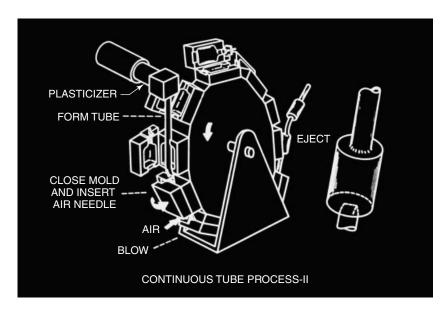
Schematic of a rotary or wheel machine with continuous extrusion of the parison. Number of blow molds depends on size of wheel diameter and extruder size for output.
